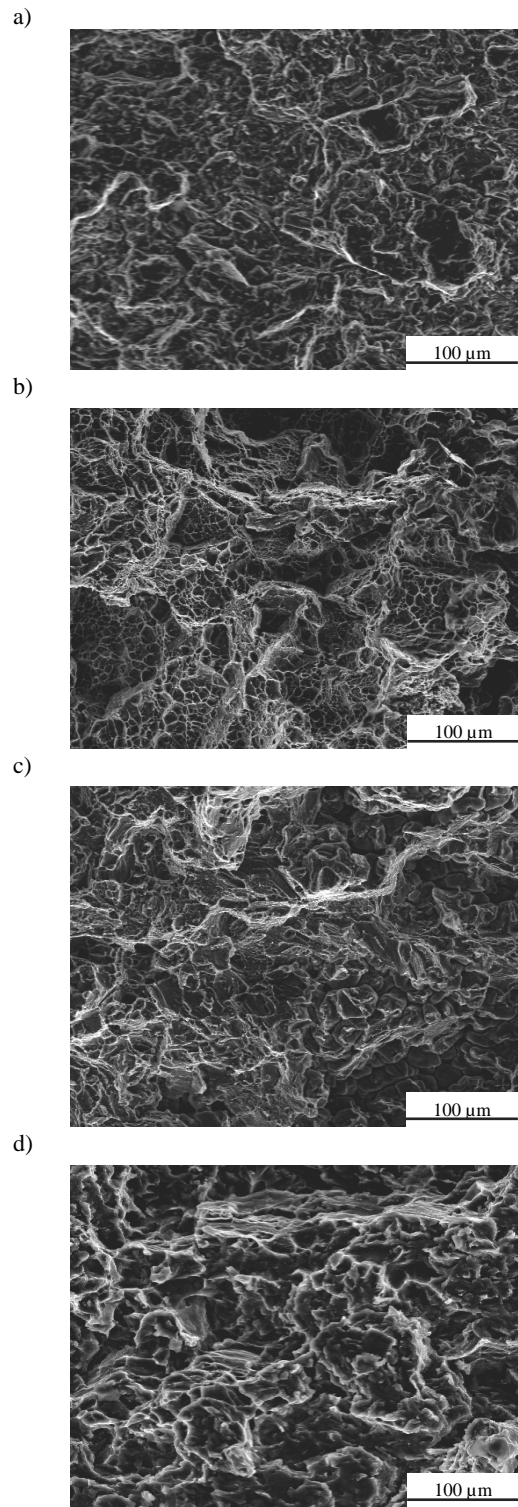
The fracture surface of tensile test alloy MCMgAl6Zn1: a) without heat treatment – as-cast, b) after cooling in the air, c) after cooling in the furnace d) after aging treatment
